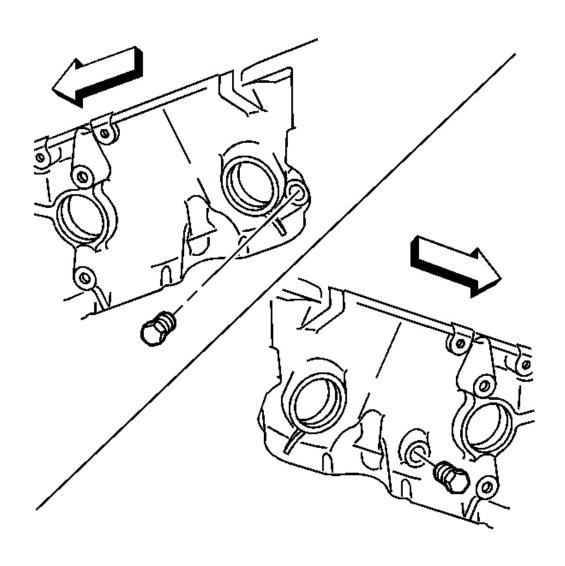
View Of Engine Block Coolant Drain Hole Plugs Courtesy of GENERAL MOTORS CORP.
